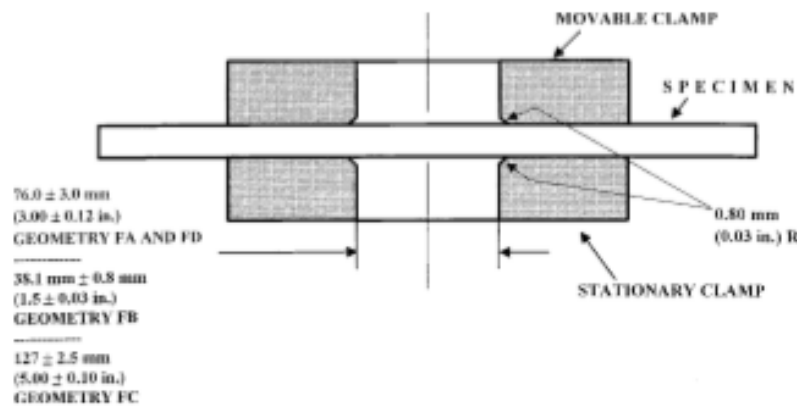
Support Plate/Specimen/Clamp Configuration for Geometries FA, FB, FC, and FD
